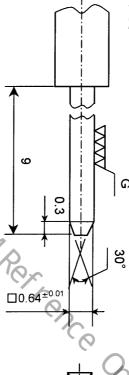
Configuration and Dimensions of Steel Gauge 図1.スチールゲージ形状・寸法
